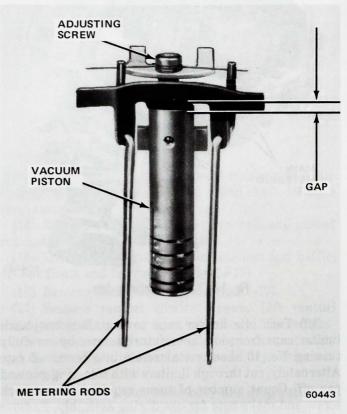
J-80 Vacuum Piston and Metering Rod Assembly
